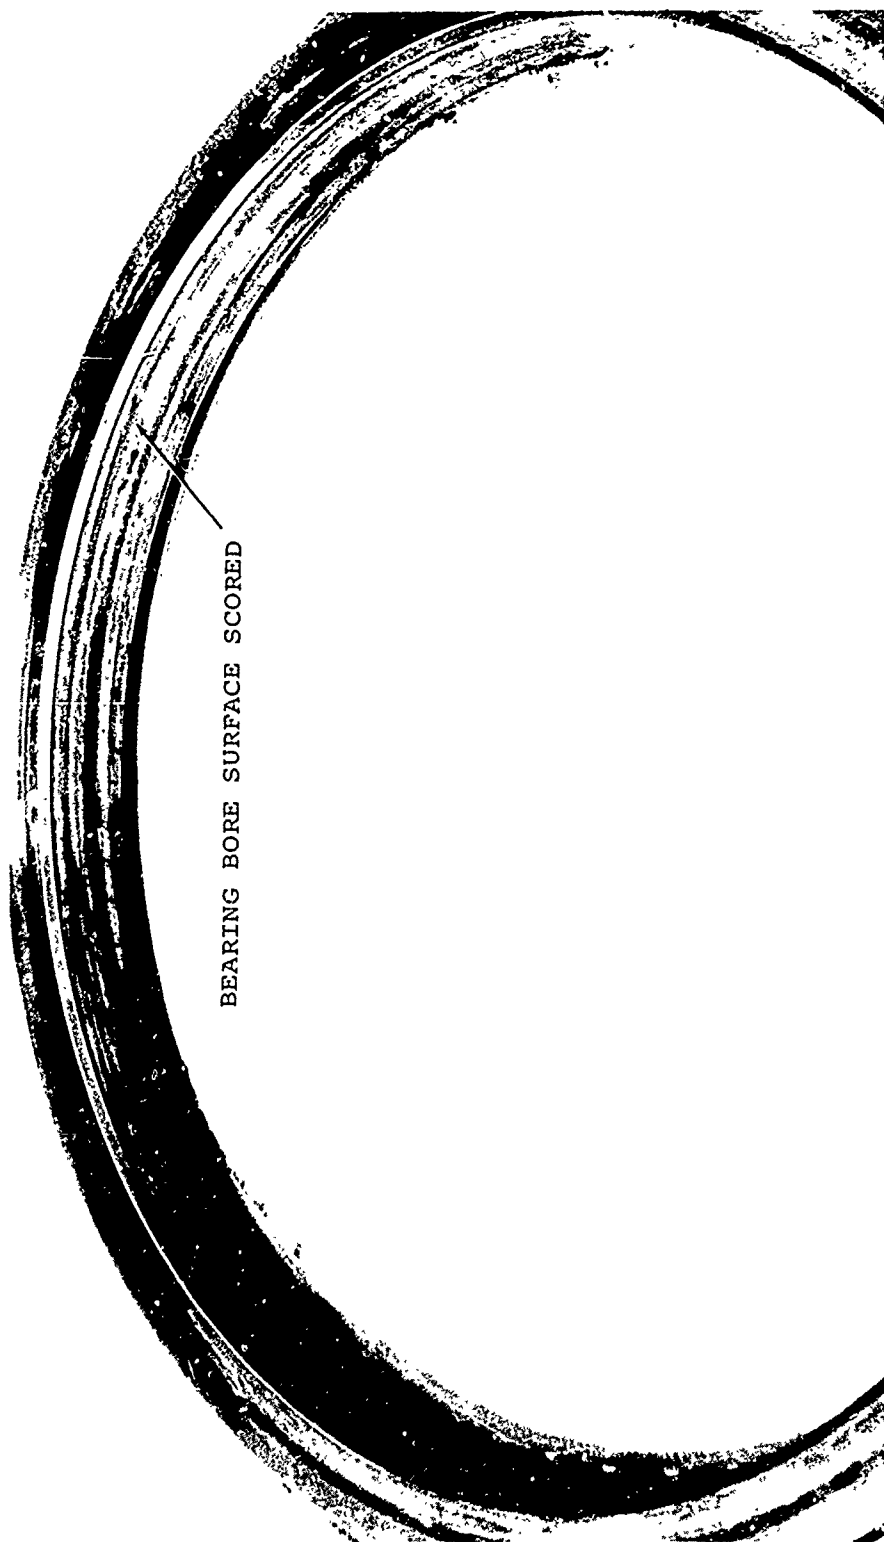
Condition of Bore of SK301-10257-2 Bearing
